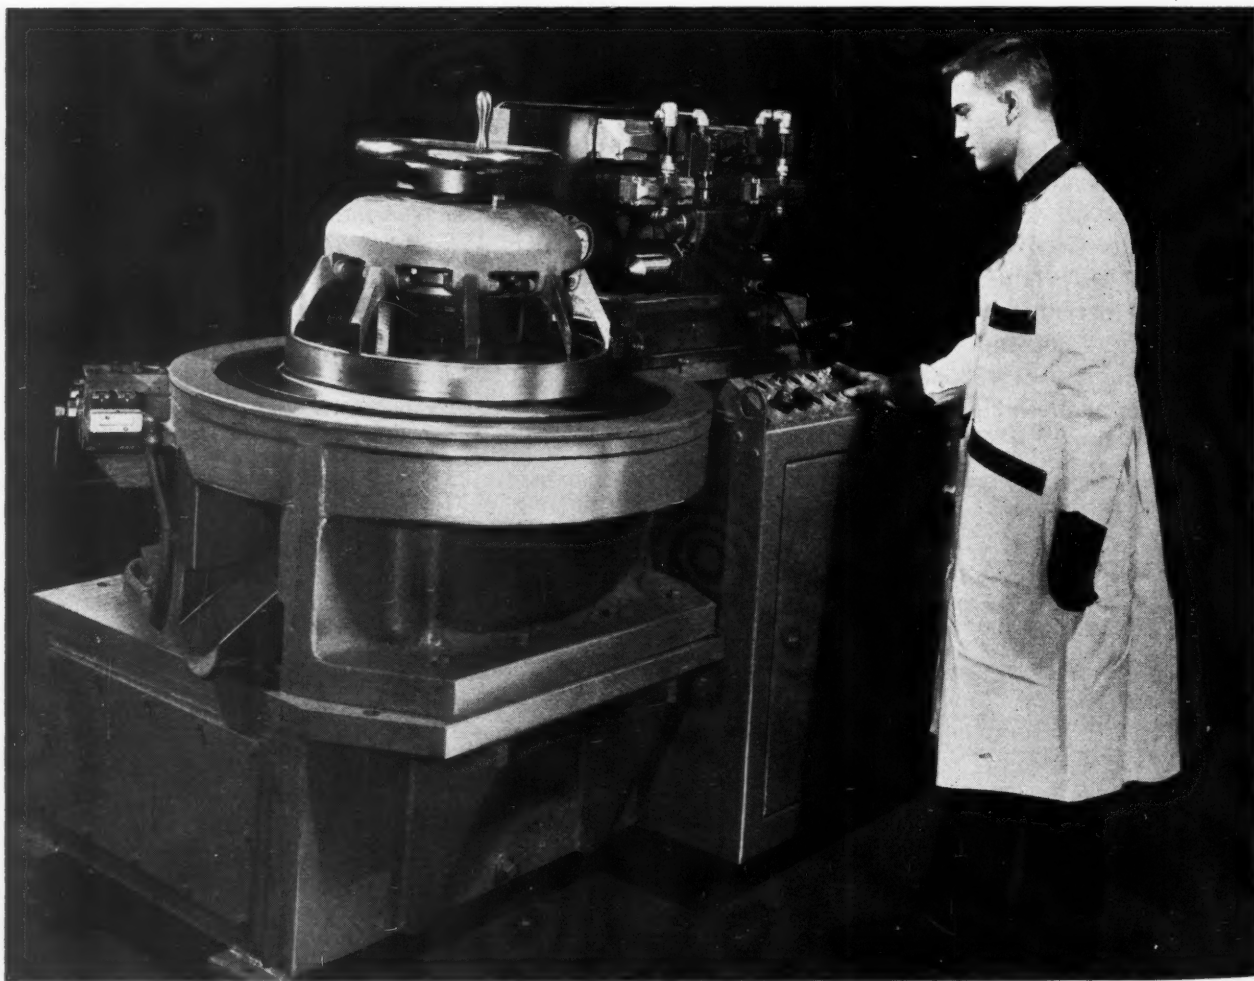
Hydraulic piercing machine built by Danly Machine Specialties, Inc., for piercing slots in jet-engine shroud rings
